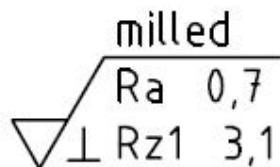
Direction of lay of surface pattern indicated perpendicular to drawing plane
